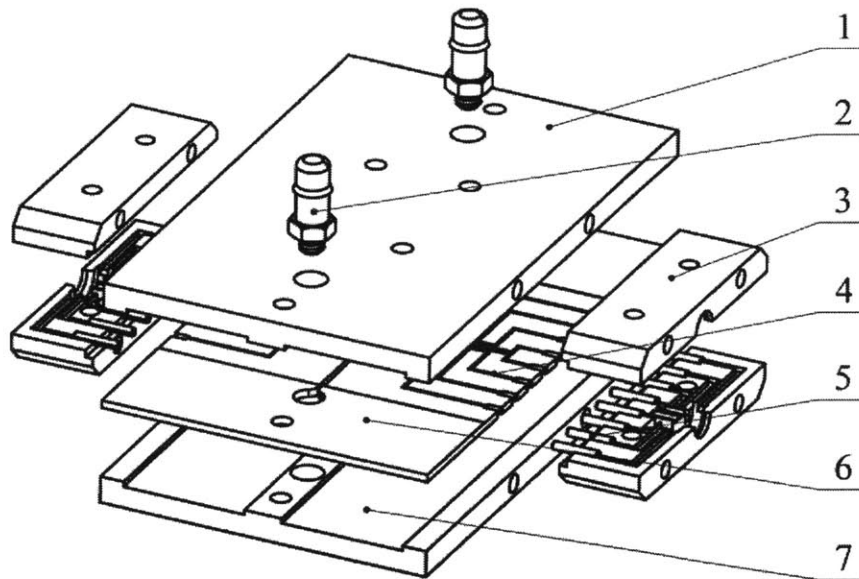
Exploded view of the 3-D model of the solid state pump. 1: Upper plate, 2: Tube fitting, 3: Electric connector, 4: Printed circuits, 5: Electrodes, 6: Middle plate, 7: Lower plate.
